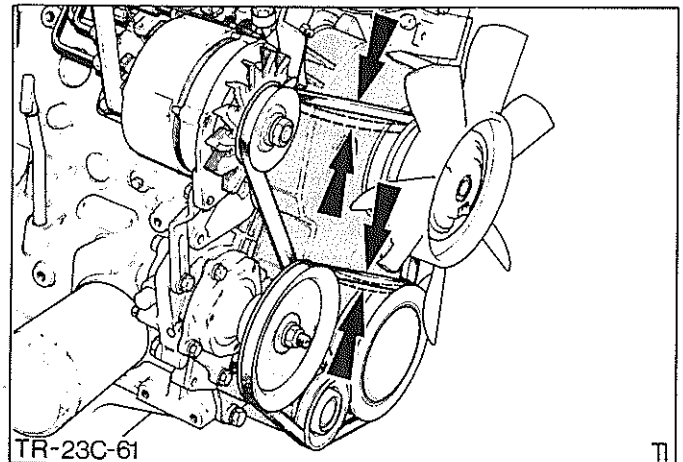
Refit alternator/vacuum drive belts and adjust belt tension.
